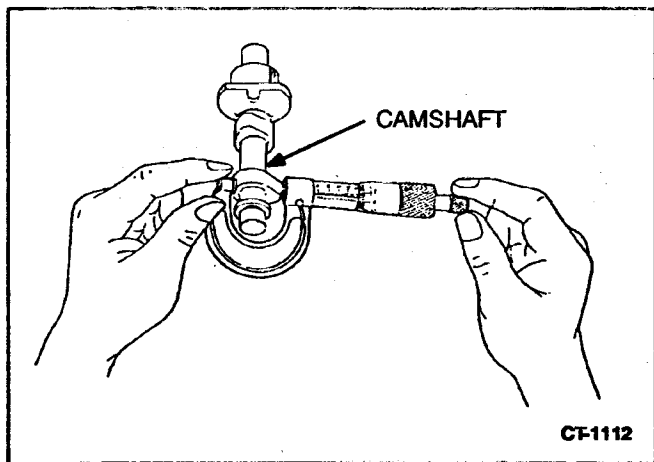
MEASURING CAMSHAFT LOBE HEIGHT
